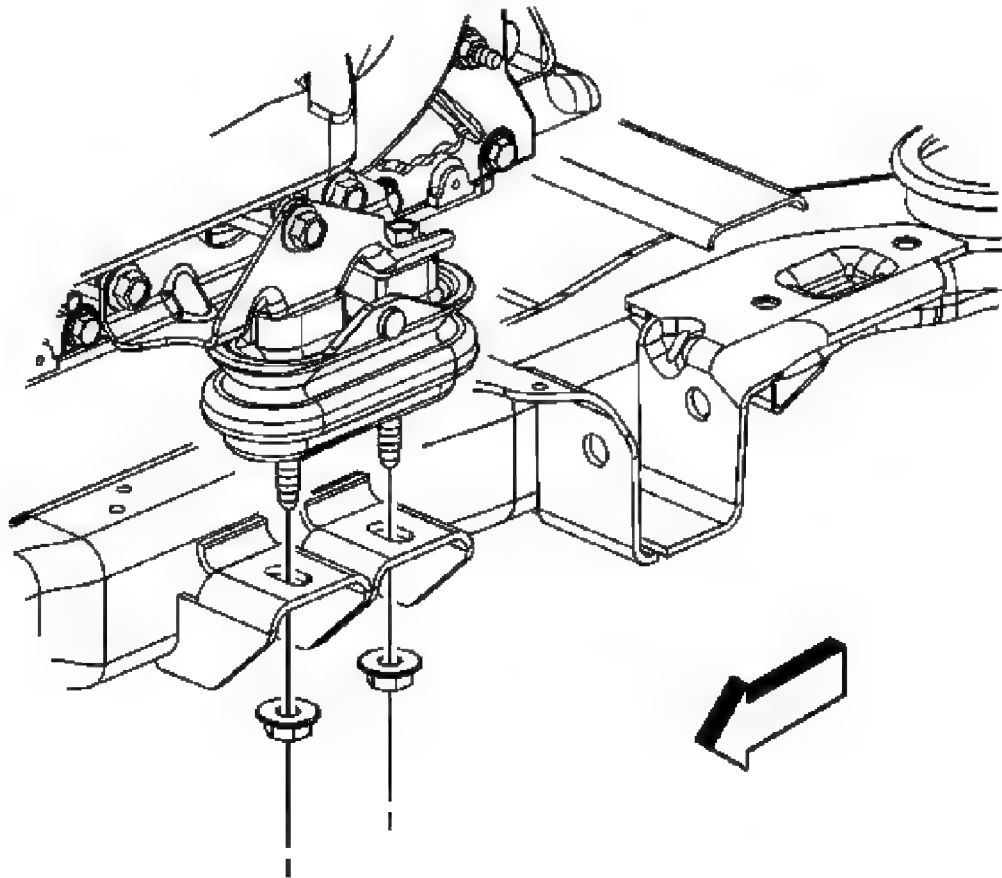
Identifying Transaxle Mount To Frame Nuts
